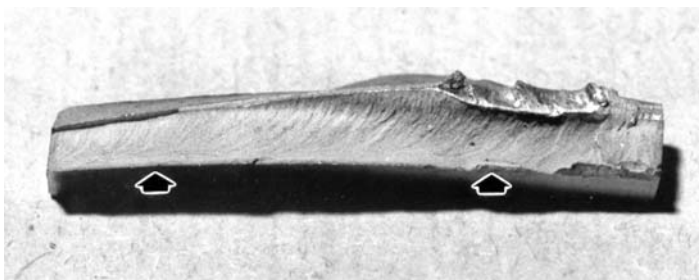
Fracture surface of the blade showing chevron marks
